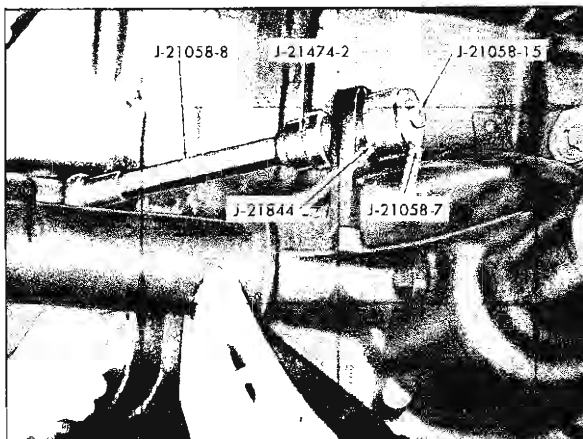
Carrier Mounted Suspension Bushing Installation (Light-Duty)
